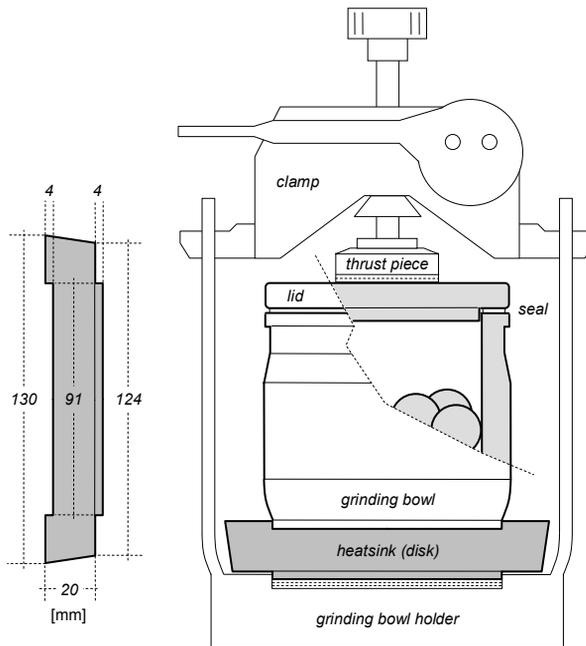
The heatsink, grinding bowl and grinding bowl holder.
